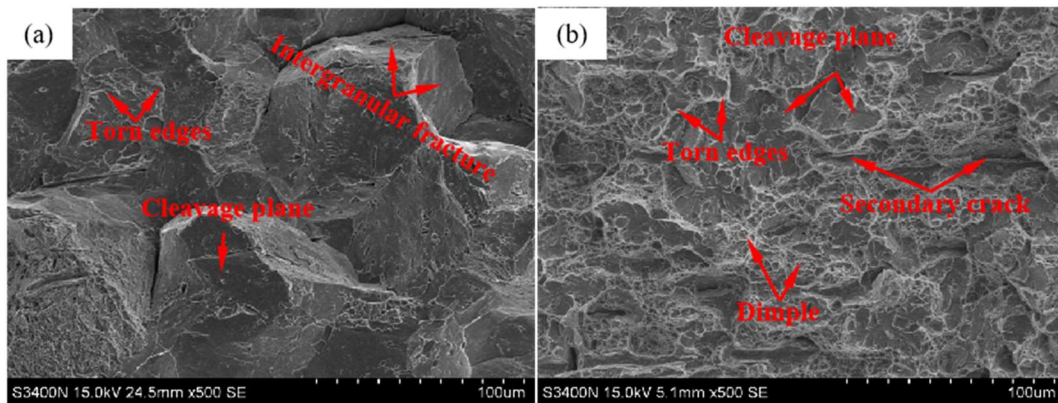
Tensile fracture morphologies: (a) arc additive repairing process; (b) Hybrid laser forging and arc additive repairing process
